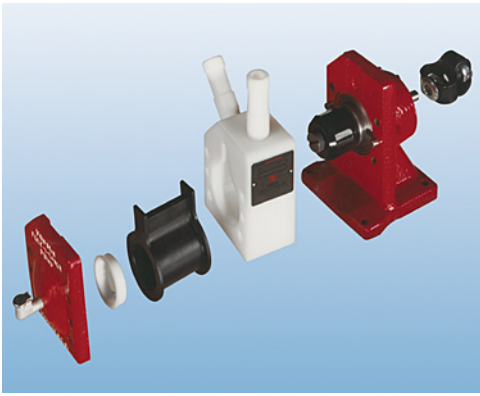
Exploded view of the Vanton pedestal mounted FLEX-I-LINER® pump showing basic simplicity of construction.
